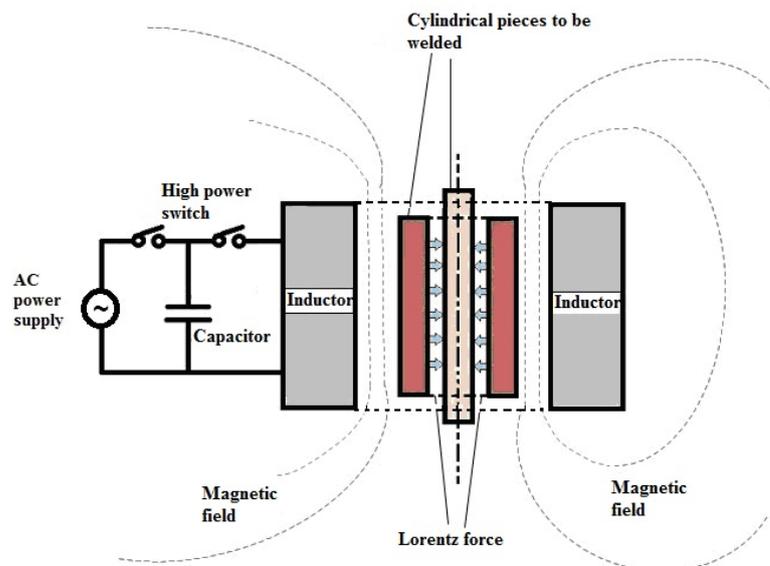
Schematic diagram of the magnetic pulse welding.
